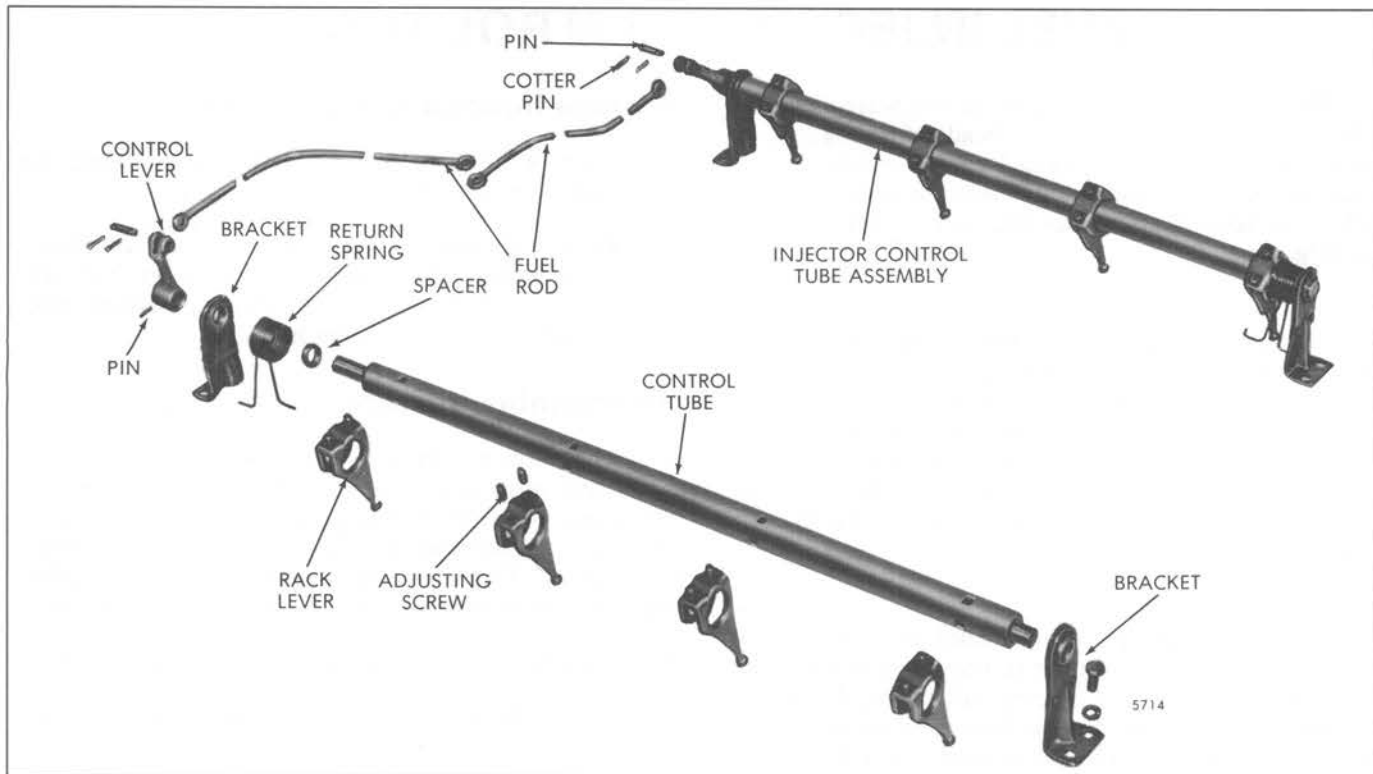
Injector Control Tube Assemblies (Non-Spring Loaded)
